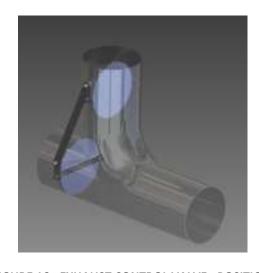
EXHAUST CONTROL VALVE - POSITION
